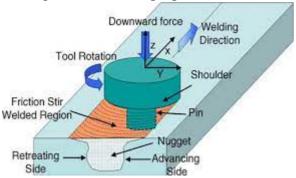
Schematic Diagram of the Friction Stir WeldingProcess
